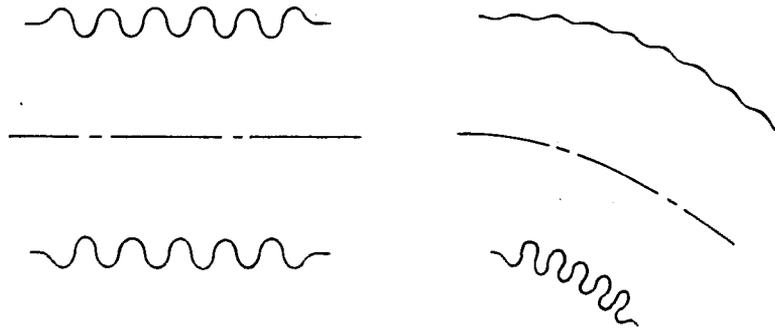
MOLDED CONVOLUTE JOINT
